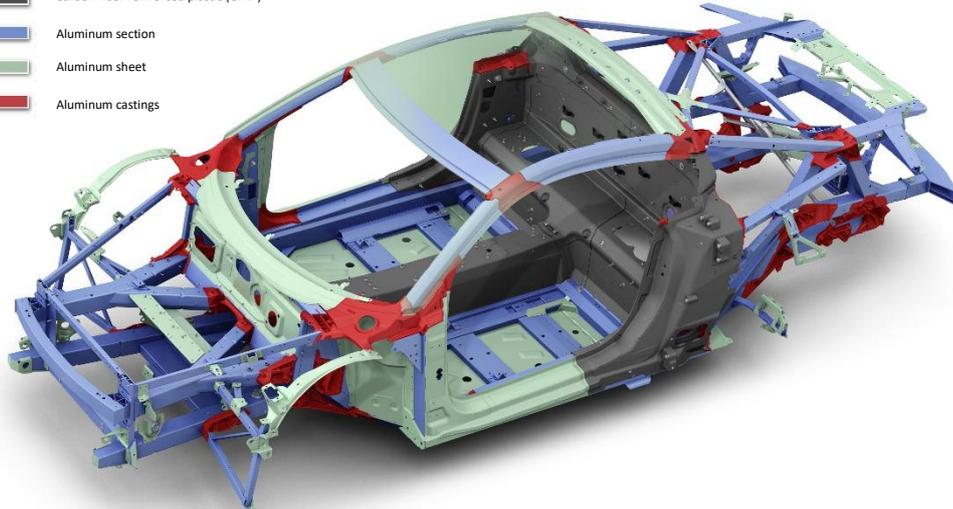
Audi R8 Aluminium Intensive Car Body. <https://www.audi-mediacycenter.com/en/leightweight-construction-246>
